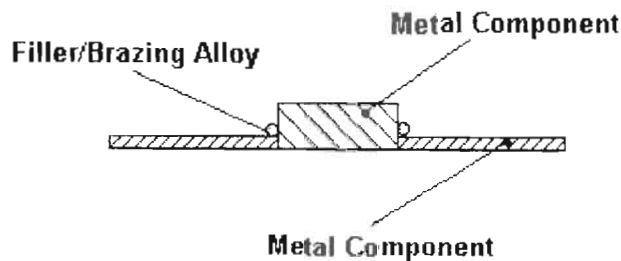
Example of a brazing ring or filler placed at a metal-to-metal joint prior to brazing.
